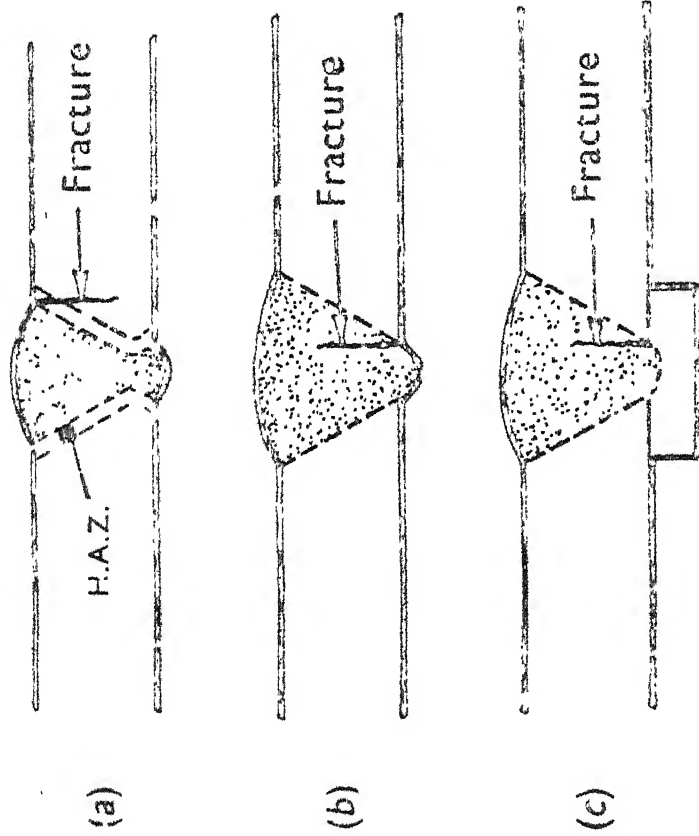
Typical modes of fracture in specimens containing transverse butt welds: (a) in heat-affected zone material and parent plate initiated at weld toe; (b) (c) in weld metal initiated at the edge of the weld root.
